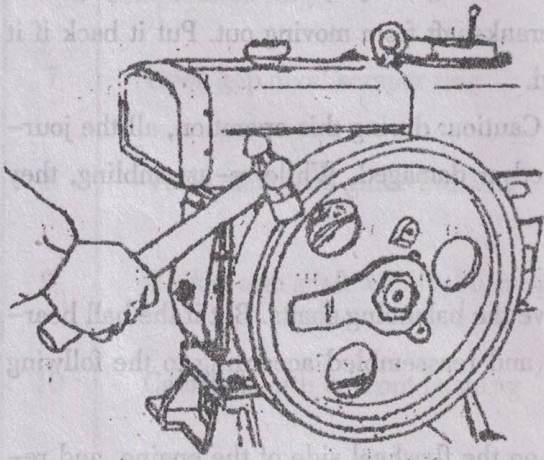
Loosening the flywheel nut by knocking the handle of the wrench with a hammer
